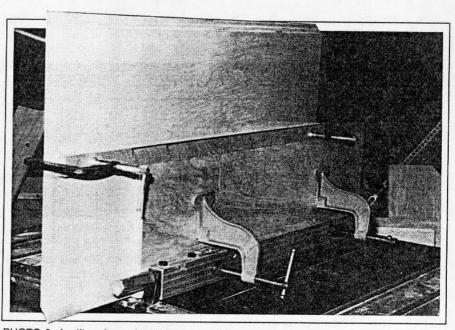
Auxiliary fence for table saw to aid cutting part G.
